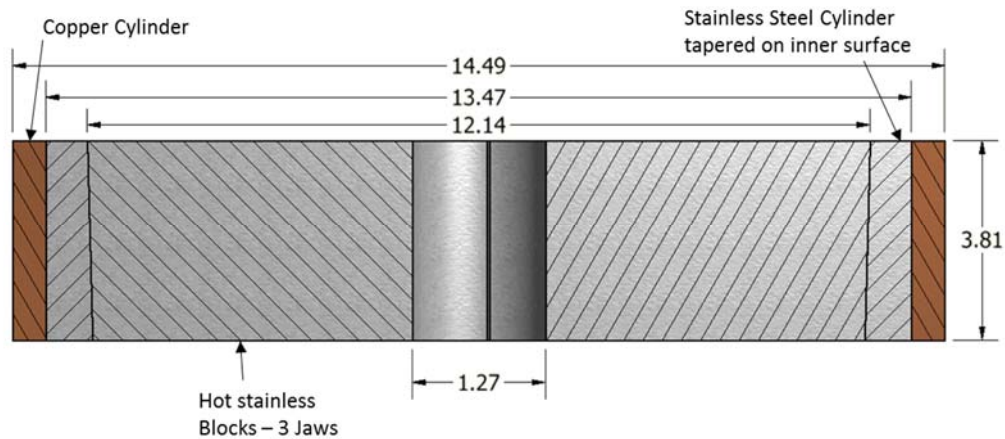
Hot side stainless steel blocks with thermocouple locations, dimensions in cm - section
